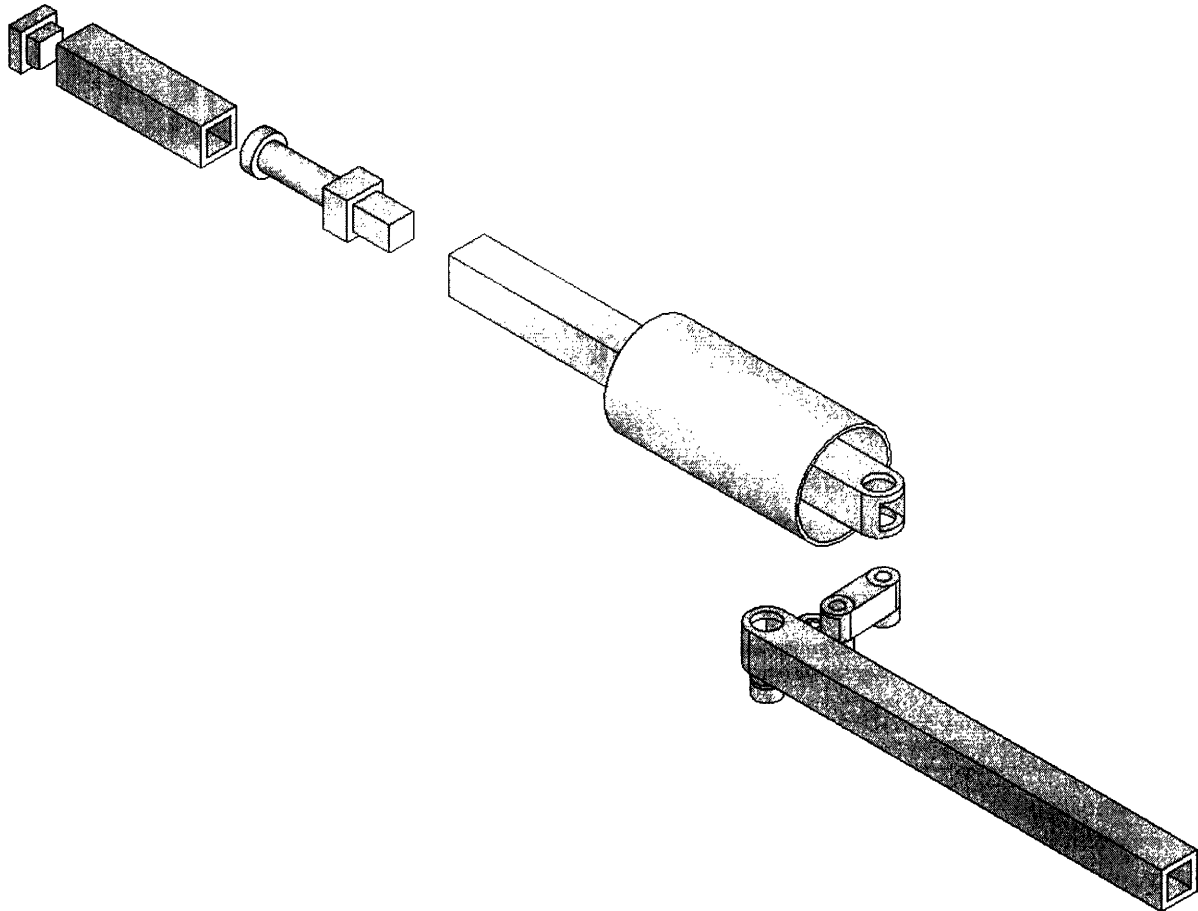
Assembled drawing of new tilter including sleeve and connecting rods.
